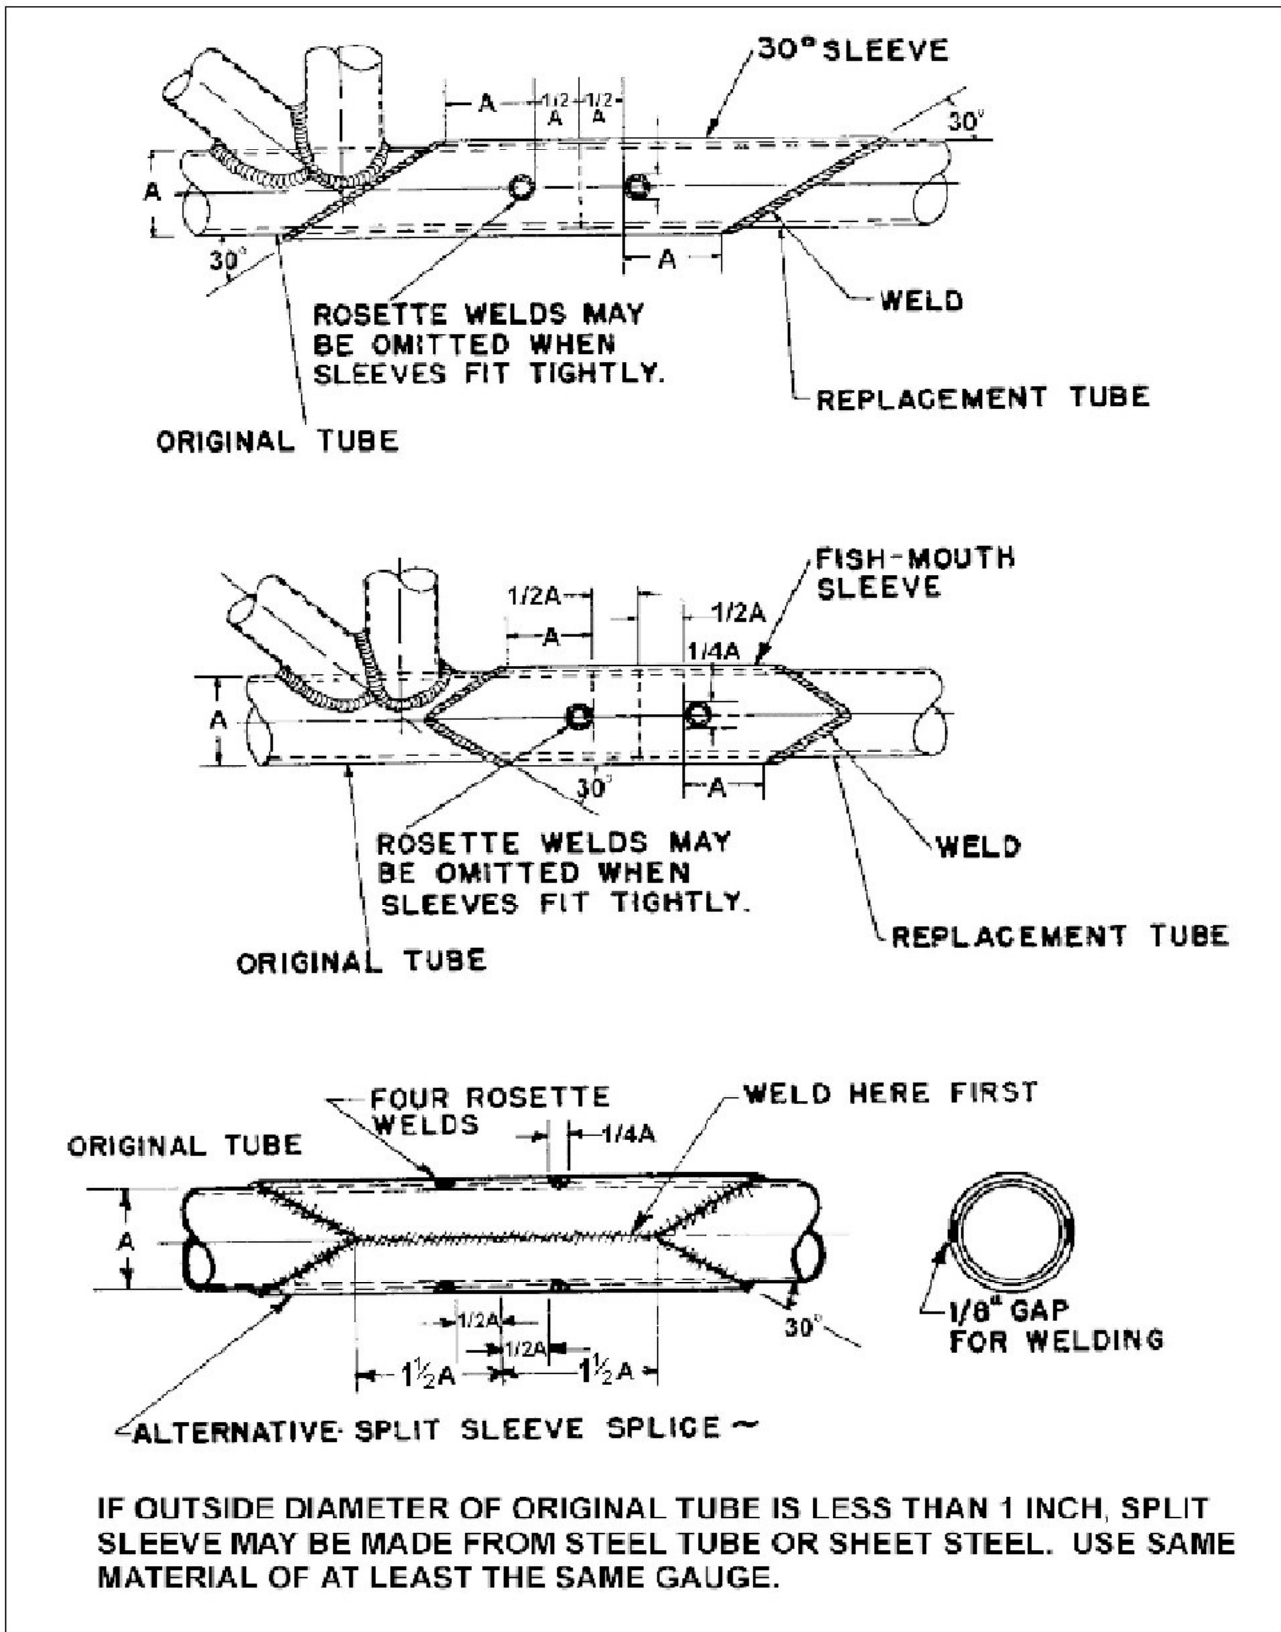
Splicing by outer-sleeve method (replacement by welded outside sleeve).
